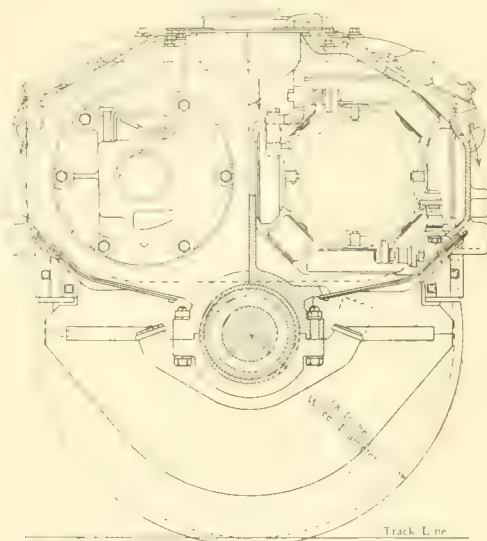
CROSS-SECTION OF A TWIN MOTOR WITH QUILL DRIVE
